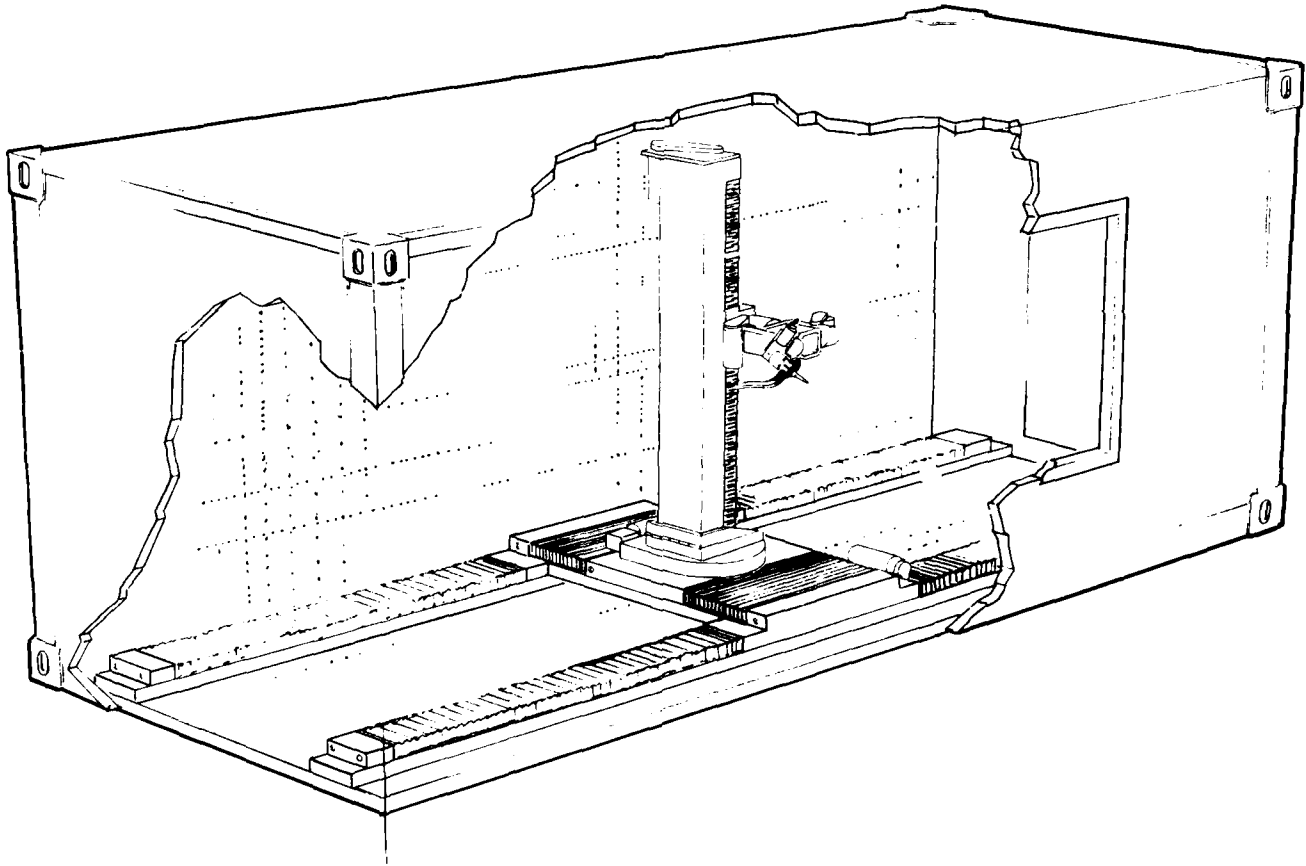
CNC MACHINING OF SHELTER INTERIOR
